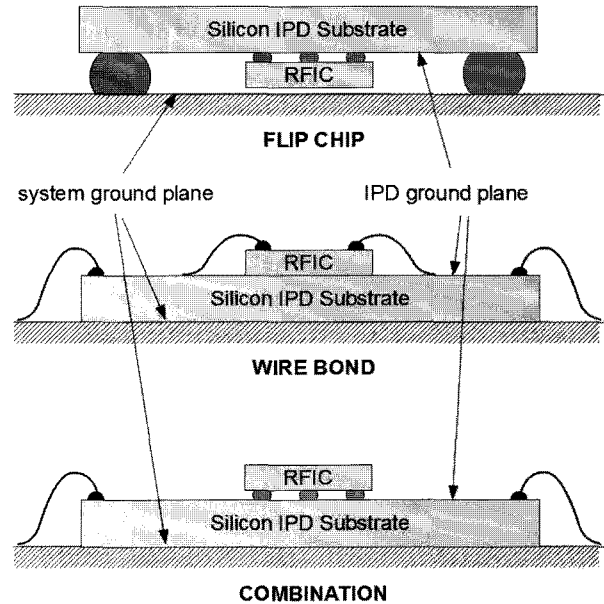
Chip-Scale Module Package (CSMP) assembly alternatives.
